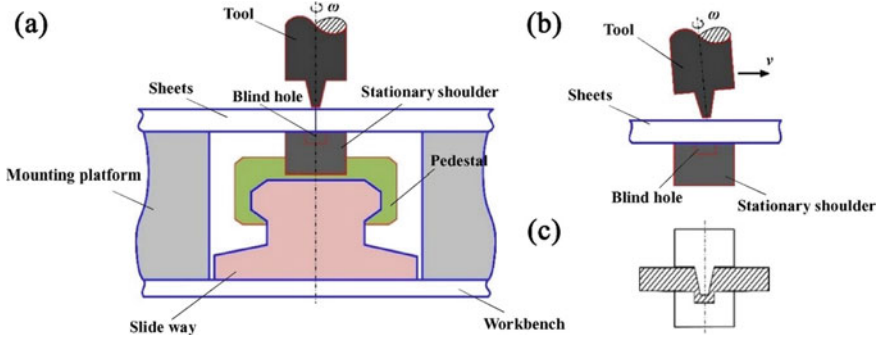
Schematics of the PFSW process: a equipment and relative positions, b lateral view parallel to the welding direction and c local cross-sectional view [68]
